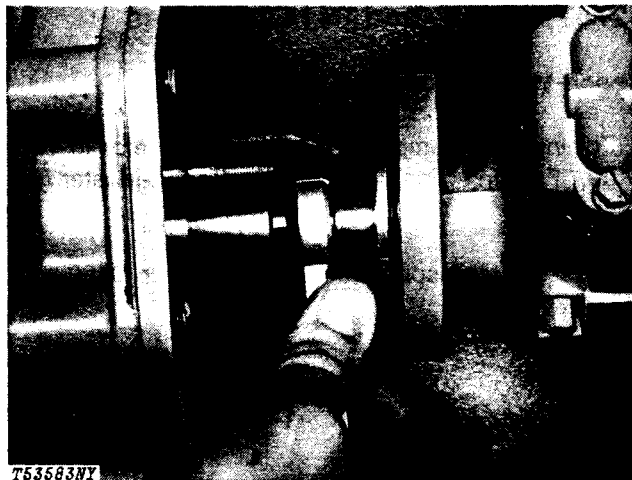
JD-256 (13371) Drive Shaft Seal Compressing Tool
